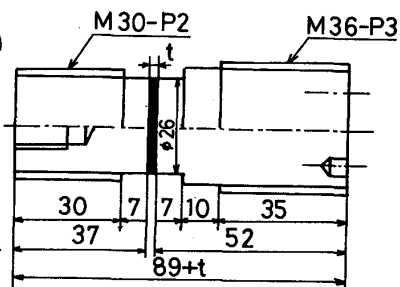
Shape and sizes of the adhesive-bonded butt joint specimen.
